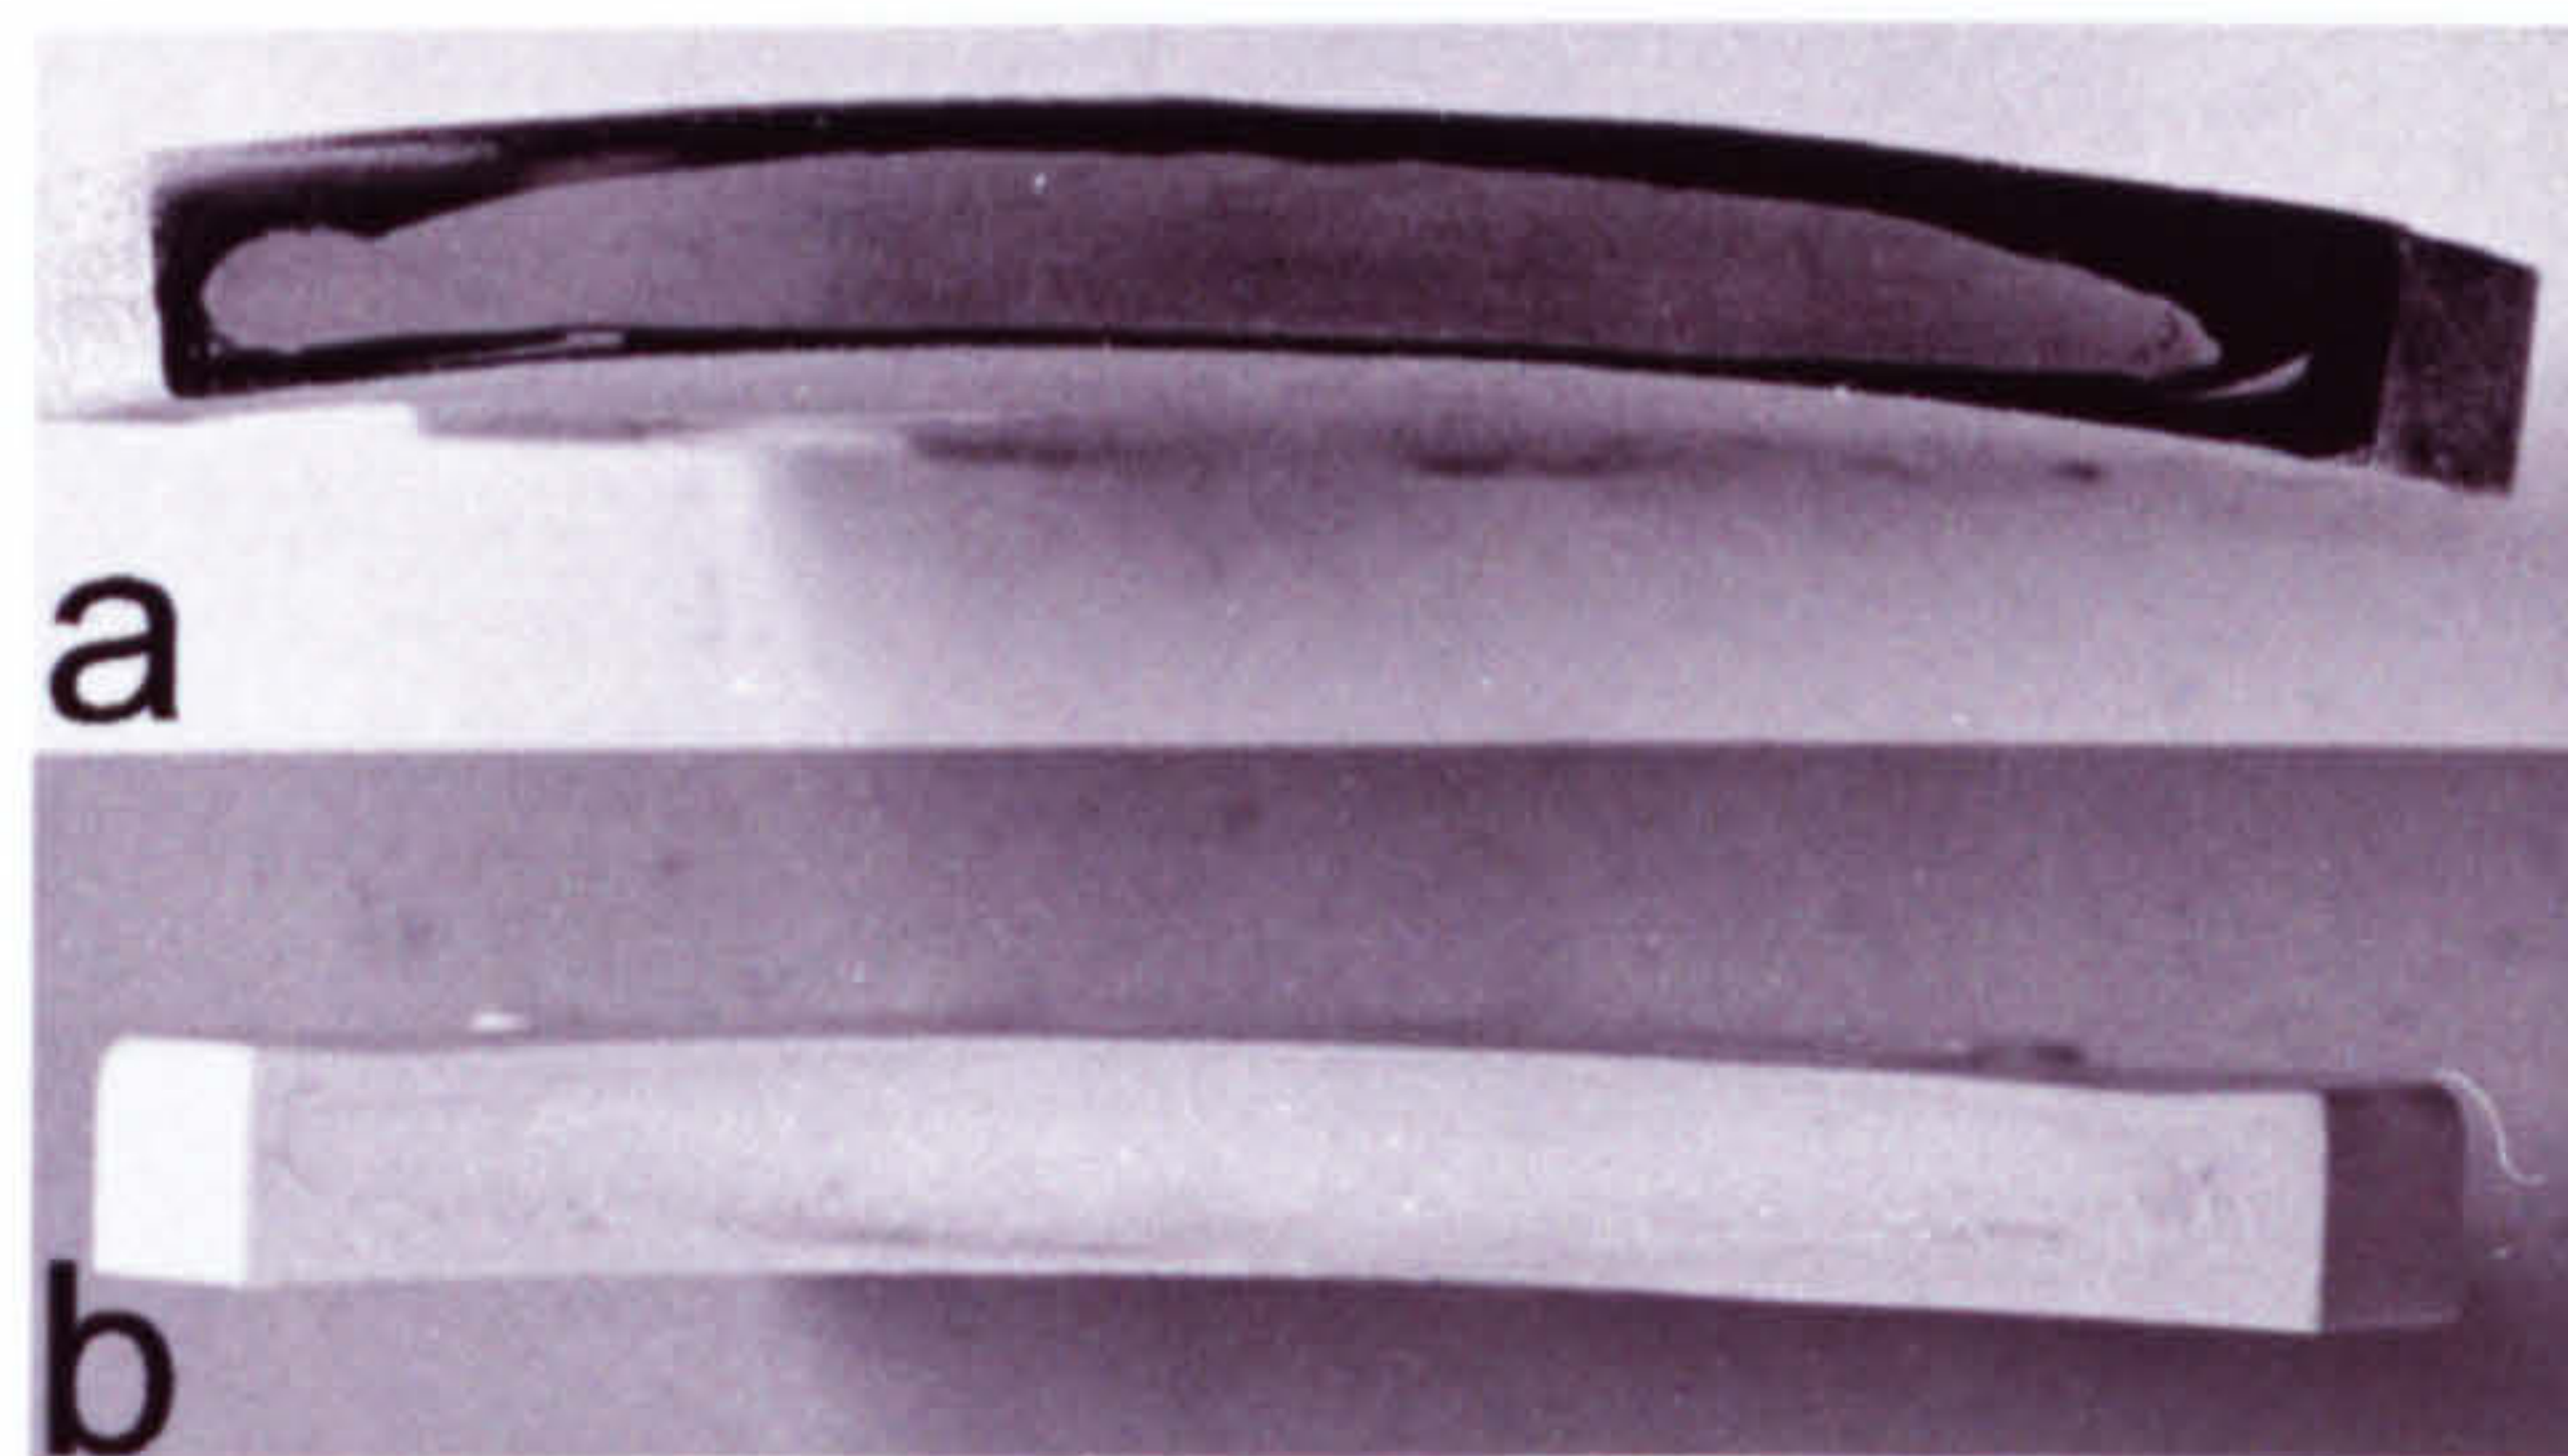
Debound and sintered sectioned powder co-injected mouldings
